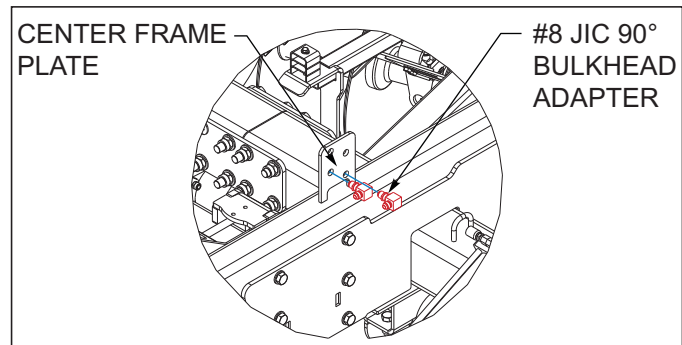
#8 JIC Bulkhead 90° Adapter Installation 2411-06
